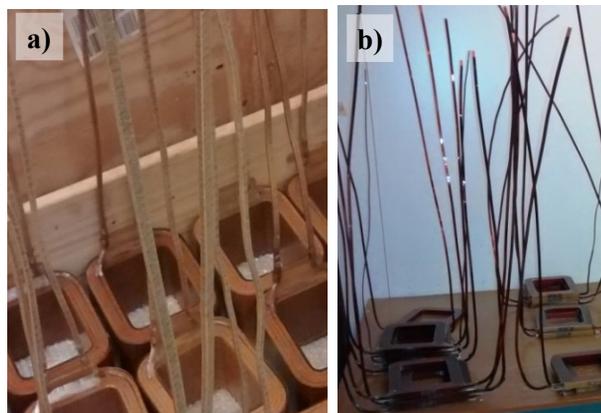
a) Quadrupole coils and b) Steerer coils after vacuum impregnation ready to be installed on the magnet yoke (showed in Figure 3).
